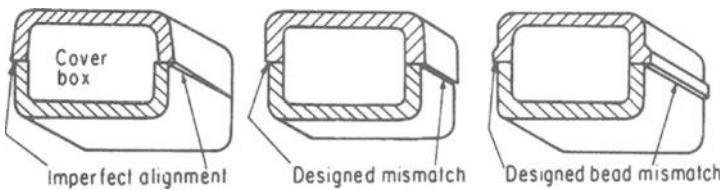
Mismatch in alignment of two molded parts (such as a box and cover) usually is traceable to part warpage or difference in shrinkage; the misalignment at the parting line appears to be improved when a bead or designed mismatch is utilized.
